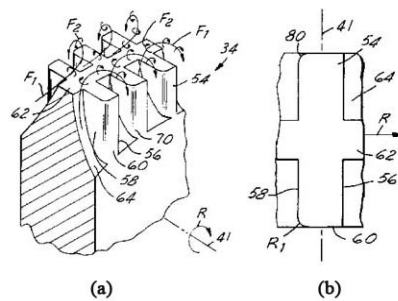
Form *impeller radius* Fuel pump laterally inclined
